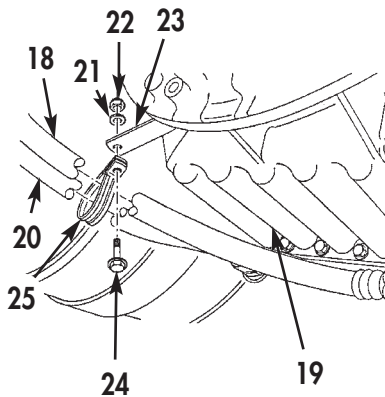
Transmission Oil Cooler Hose Clamp Installation.
